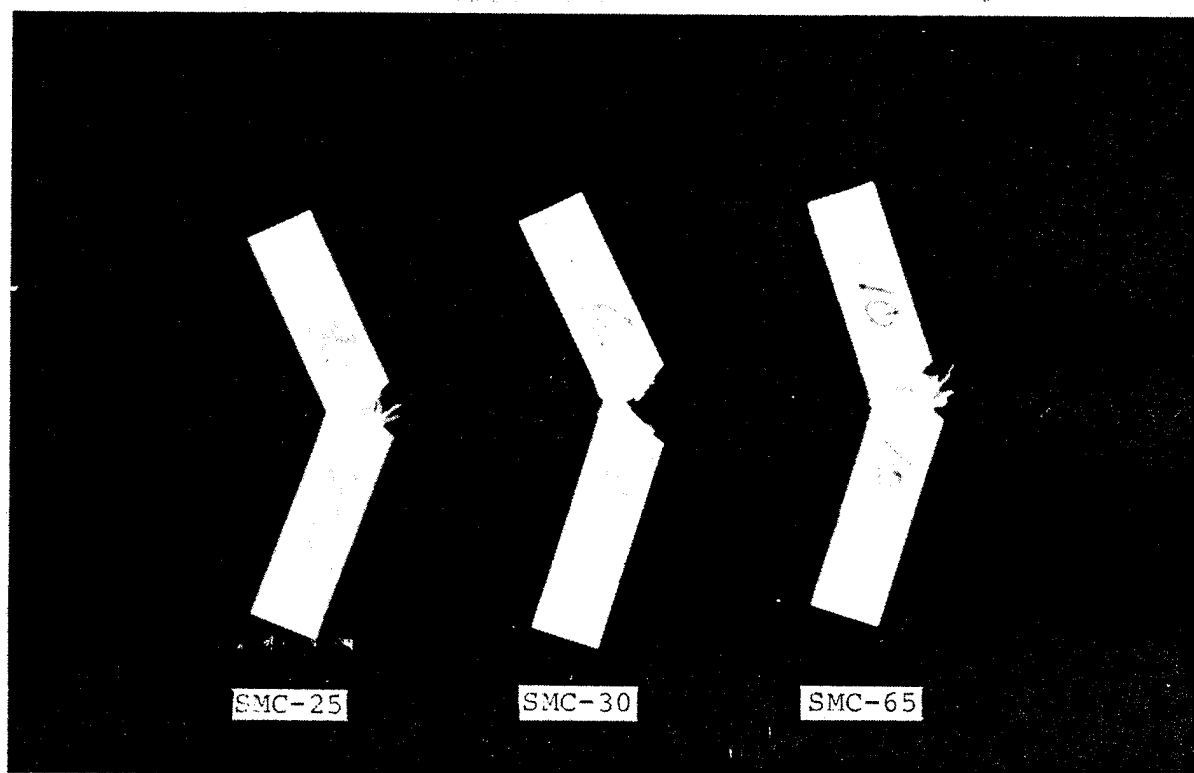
FRACTURED IZOD IMPACT SPECIMENS
